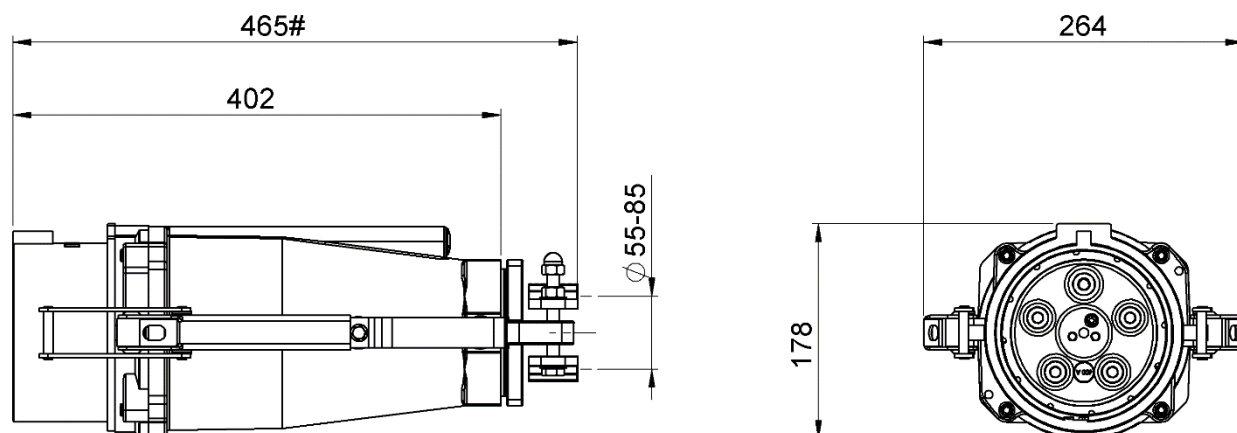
Dimensions Male Connector MC A-Line (500 A – 600 A) in mm
